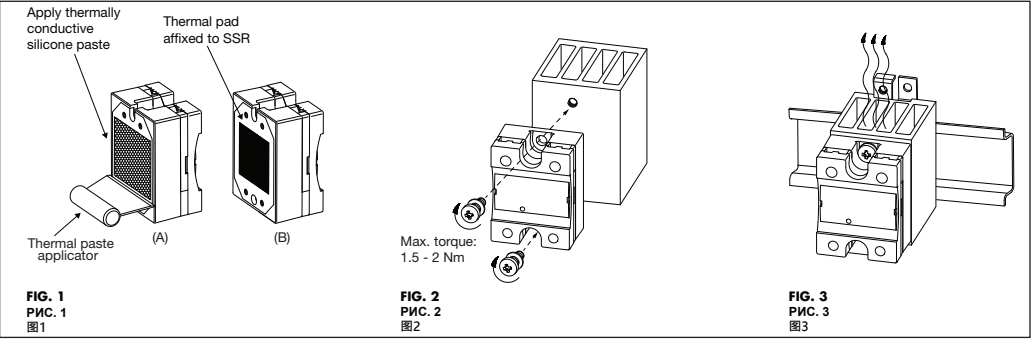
A thermal interface is required between SSR and mounting surface. Thermally conductive silicone paste shall be applied and spread throughout the base of the SSR (A). Alternatively, an interface material with adhesive on one side shall be affixed to the baseplate of the SSR before mounting the SSR on the heatsink (B).
